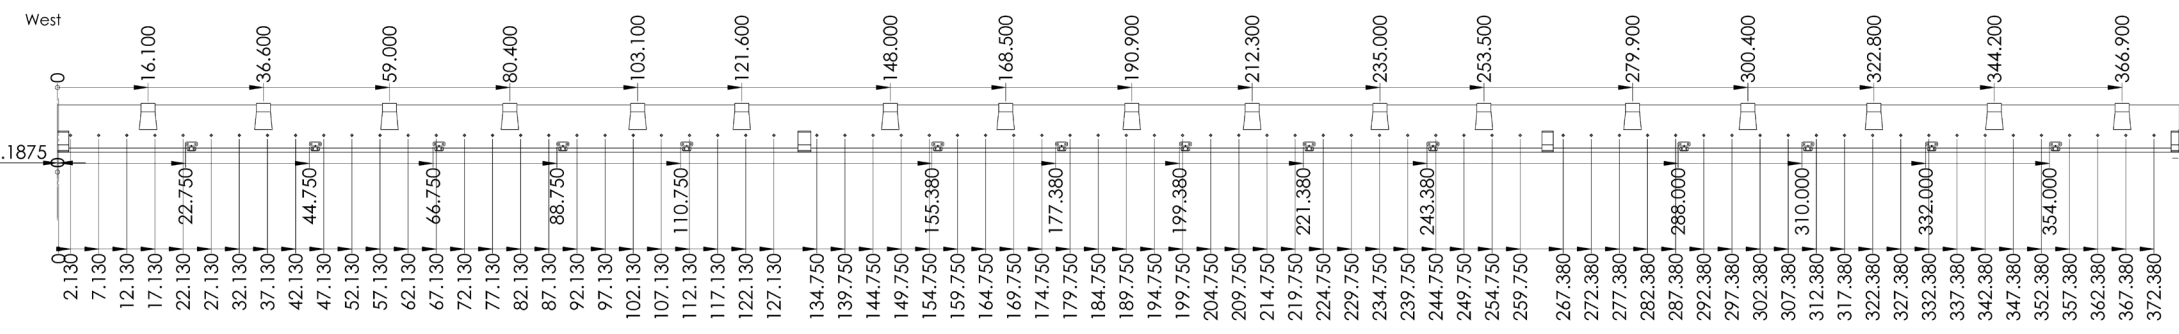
2D Drawing of West section. Spacer buttons, connectors, and supply hose locations. Dimensions in inches.
